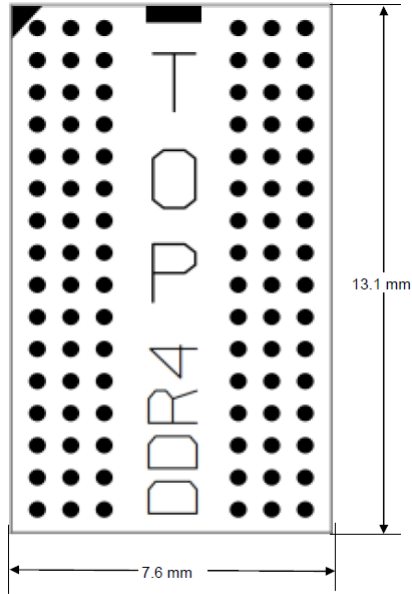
W4631A DDR4 x16 BGA interposer dimensional diagram.
